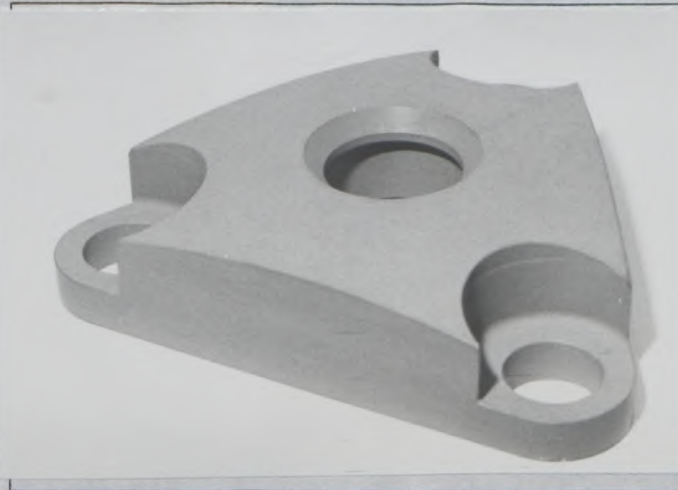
REINFORCED TOPMOUNT TYPE B
